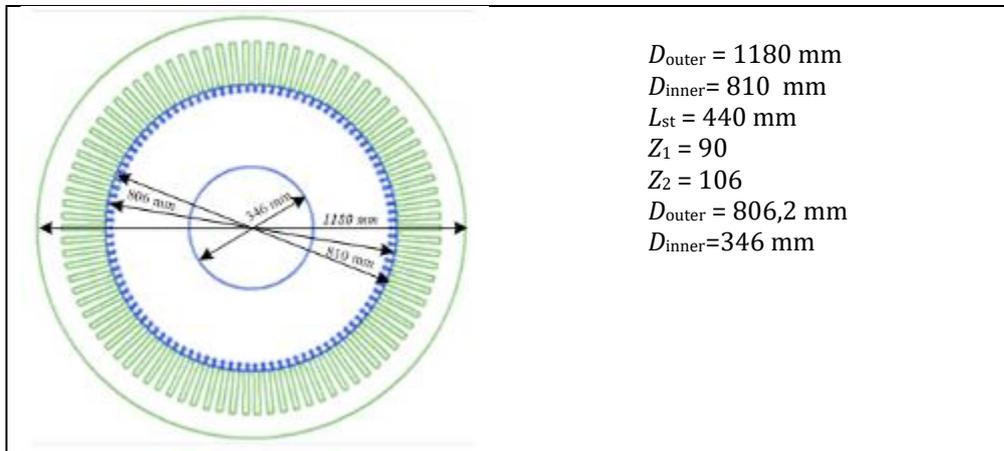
Principal dimensions of the DAZO2-16-44-6/8U induction motor.
